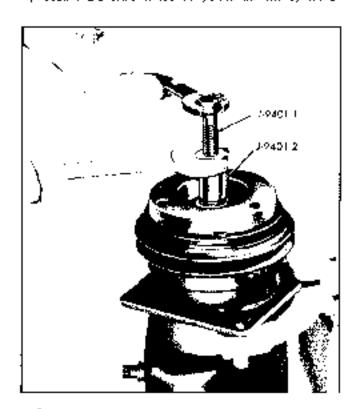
A-5. Removing hub and Drive Flate Assembly.
